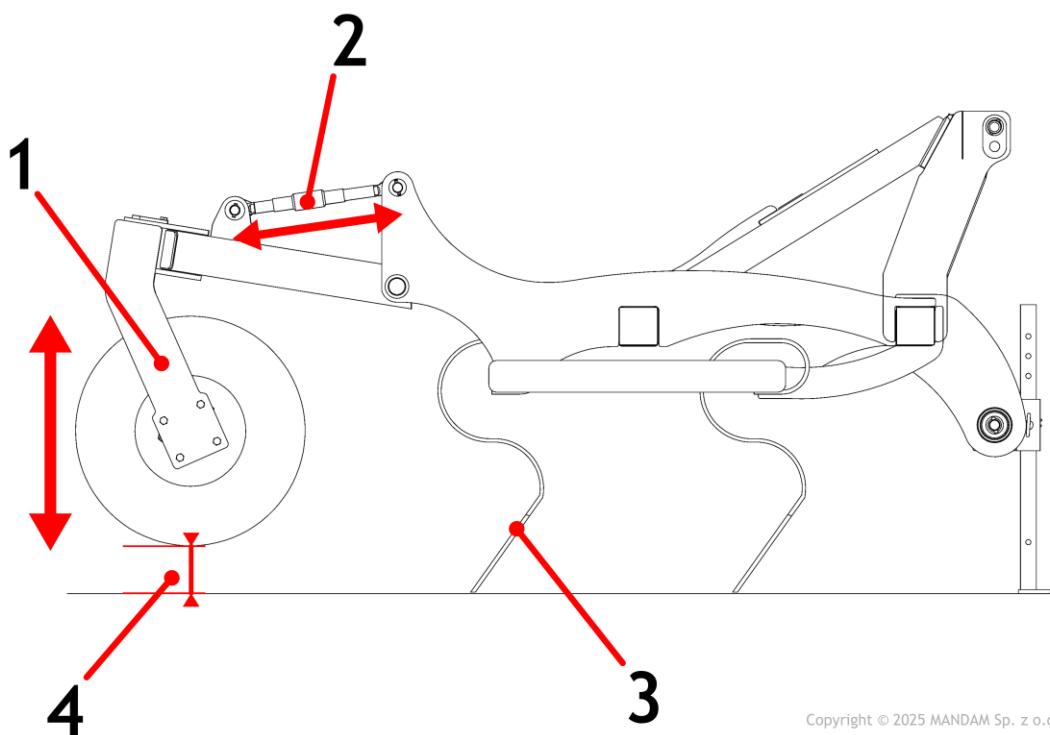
Working depth adjustment (1 - support wheel, 2 - turnbuckle, 3 - spring thin, 4 - working depth)
